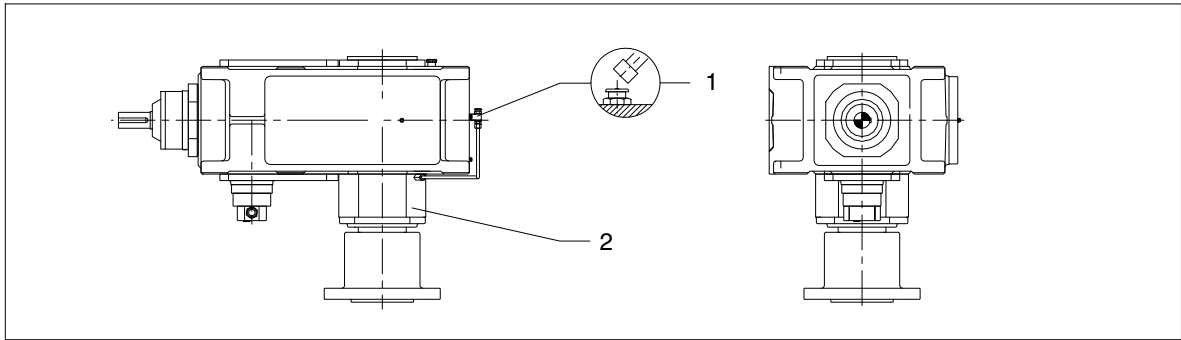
Lubricating point for lower output-shaft bearing of type B.BV with oil-dam pipe (see item 5.7.5)
